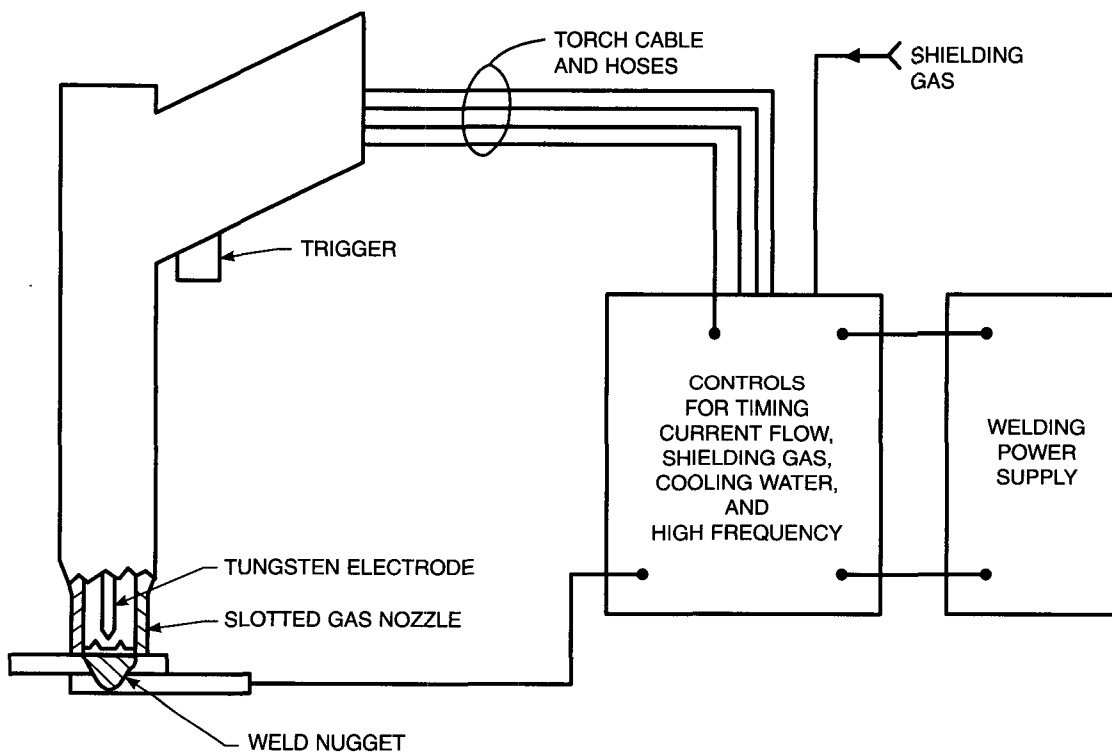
Schematic of Manual Gas Tungsten Arc Spot Welding
